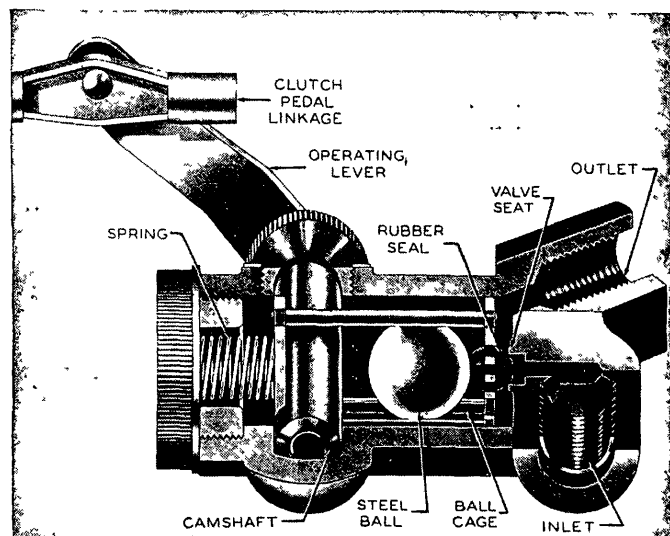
Sectional view of hill holder when clutch pedal is depressed
